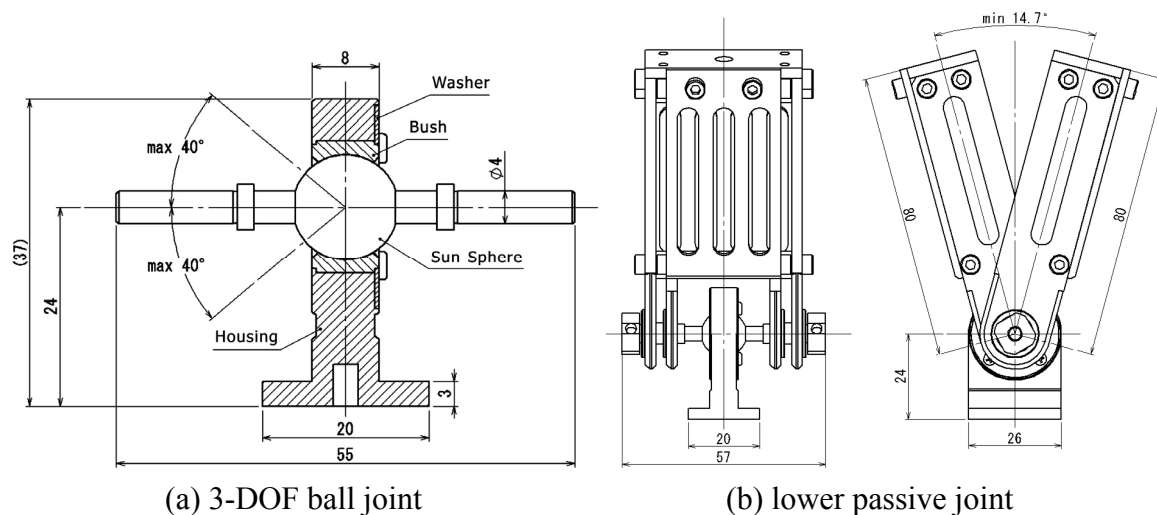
3-DOF ball joint and assembled lower passive joint for WL-16.
